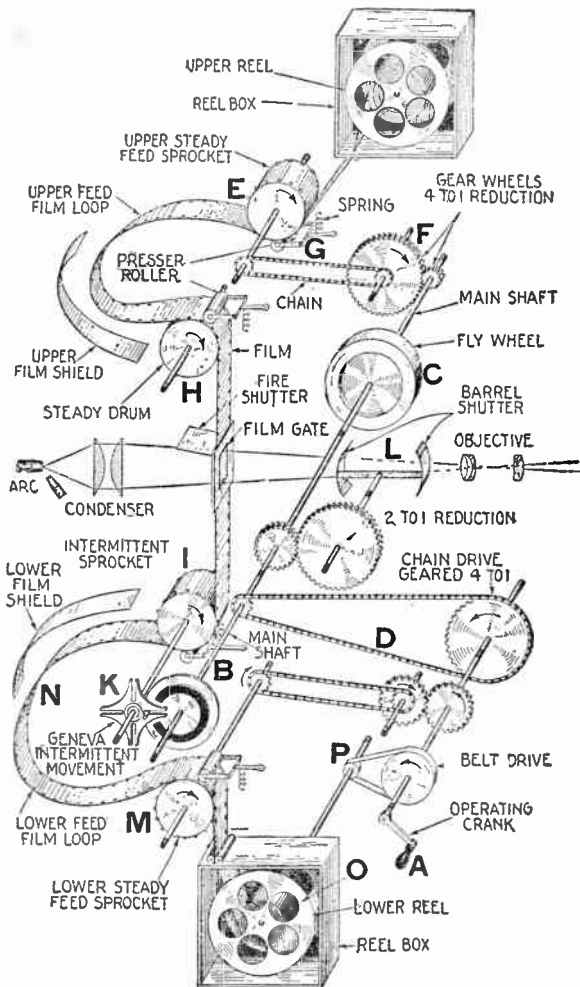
Elementary moving picture machine without case showing essential parts arranged to illustrate plainly the motion system.
